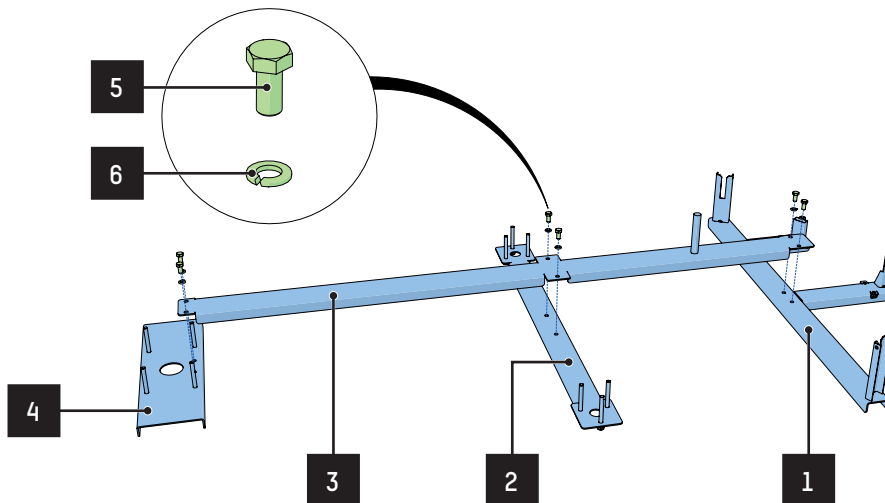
Anchoring frame assembly (GBR-E-0105190)
